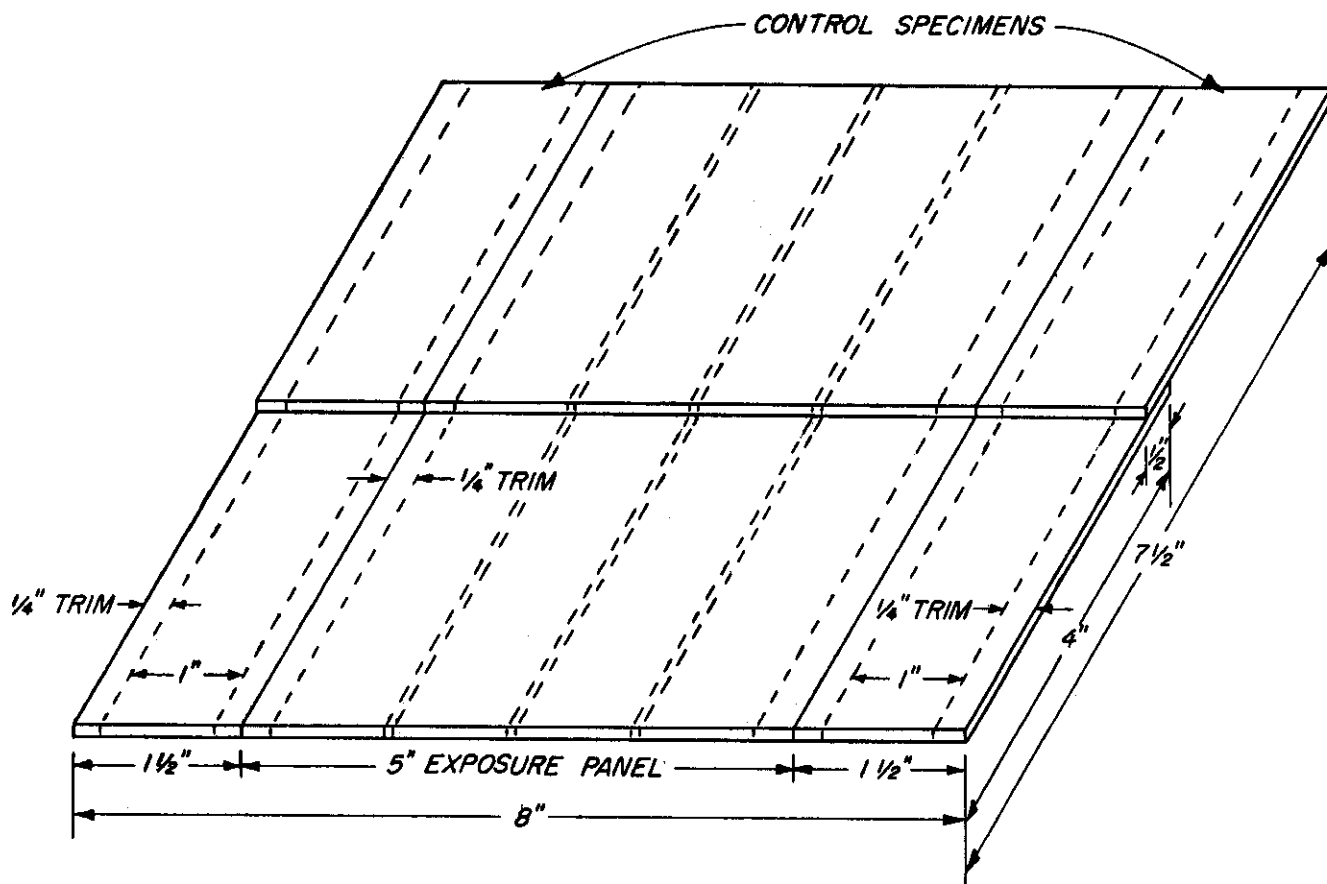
Method of cutting lap-joint specimens of 0.064-inch clad 2024-T3 aluminum alloy for control testing and exposure.
